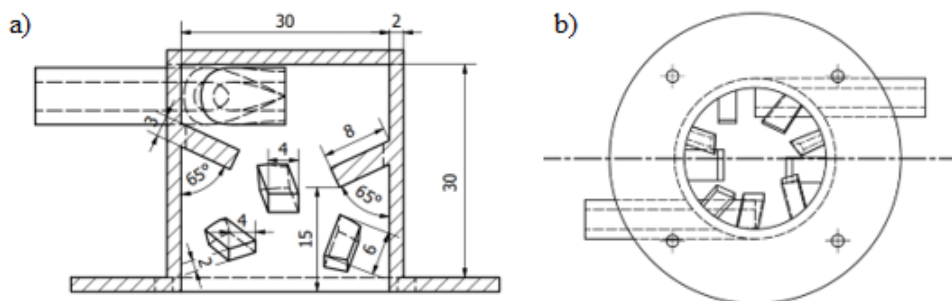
The chamber of an atomizer with insert set No. 1: a) cross-section, b) bottom view
